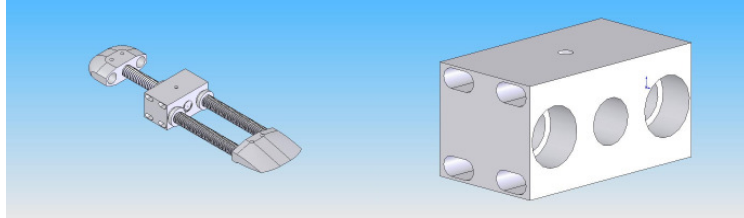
Rib parts: on the left assembled rib expansion mechanism; on the right central block
